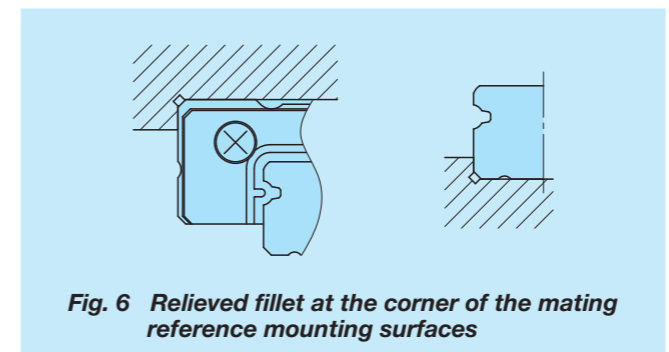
Relieved fillet at the corner of the mating reference mounting surfaces
